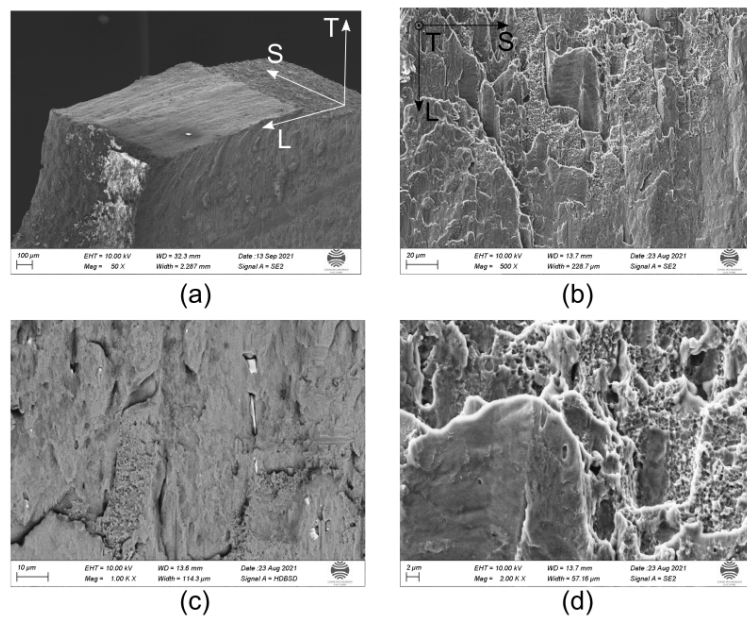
Fractography via scanning electron microscopy (SEM) of 2198T8R under 'tension to shear' (TS): (a) Macroscopic smooth fracture surface, (b) shear fracture feature, (c) elongated intermetallic particles and (d) flat-like fracture feature with void sheeting features of sub-micro dimple cluster.
